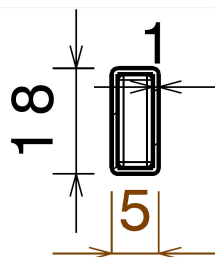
The cross-sectional layout of the structural arms of the UAV
